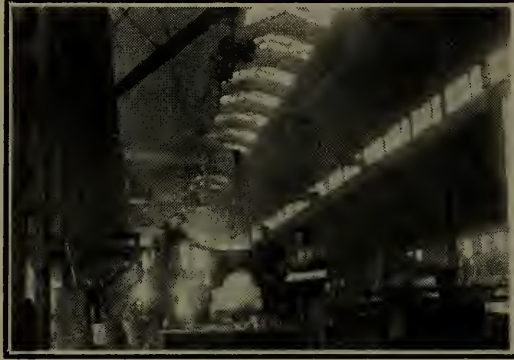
In the foundry of the Lidgerwood Mfg. Co., Newark, N. J., air motor hoists are used in conjunction with swinging wall cranes for handling molds, patterns, etc. Note that it has been found advantageous to install these wall frames and hoists, in spite of the fact that the traveling crane serves the entire foundry.
